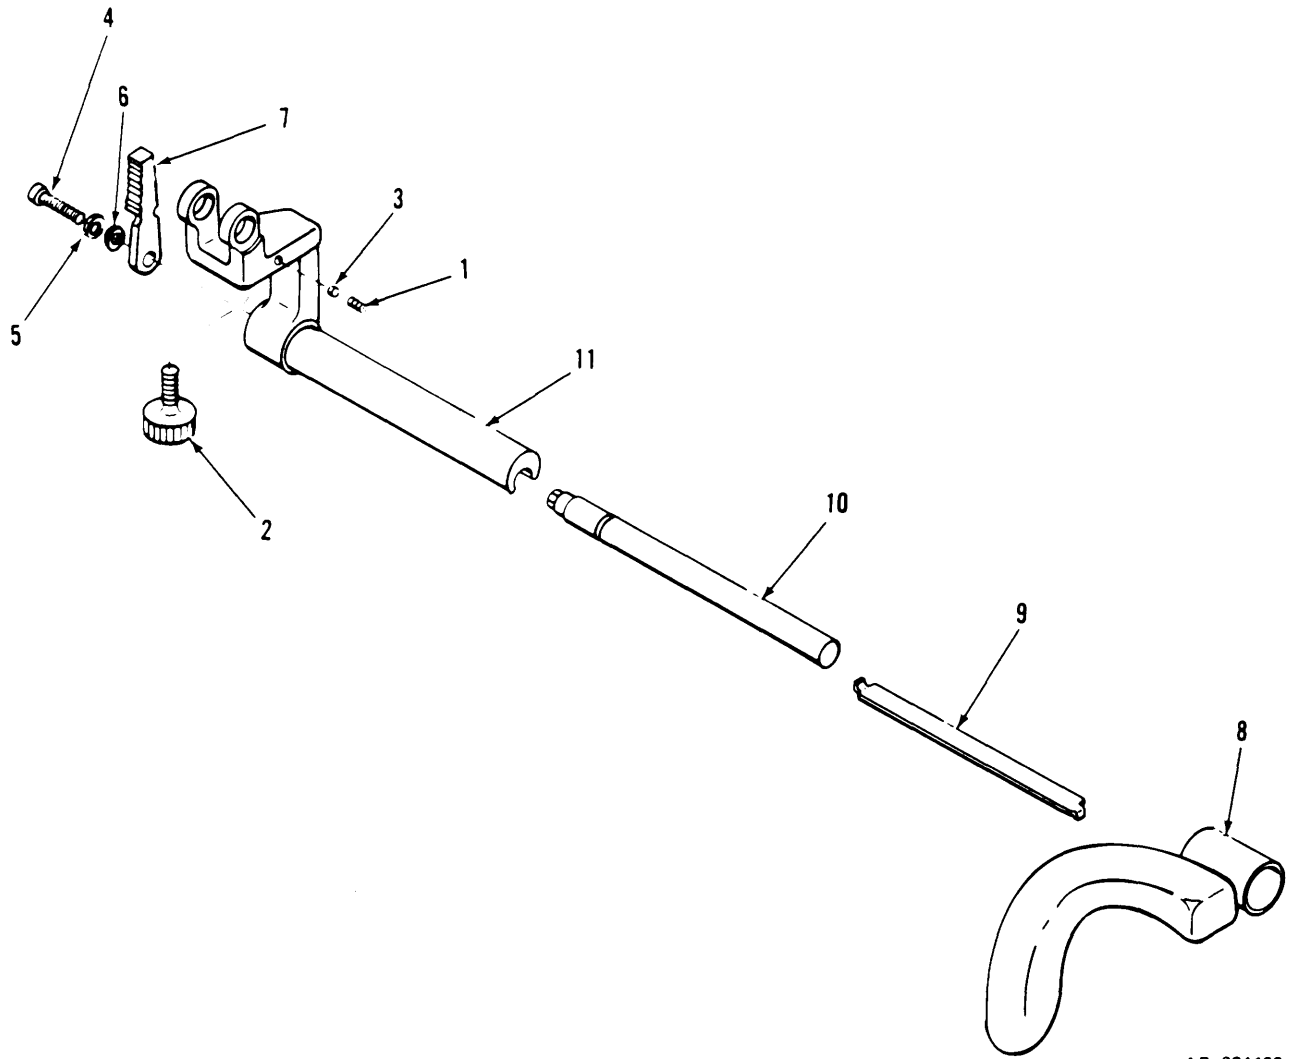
Headrest assembly (right) M119 8619420, M119E1 11727445
